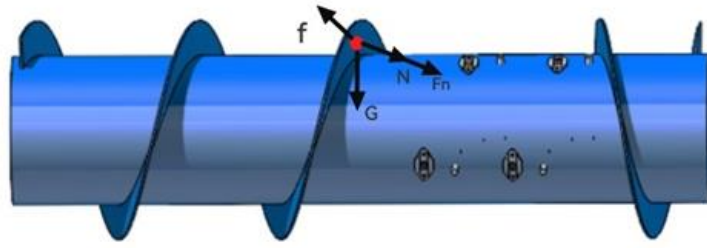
Conveying state of sesame capsule in screw conveyor device
